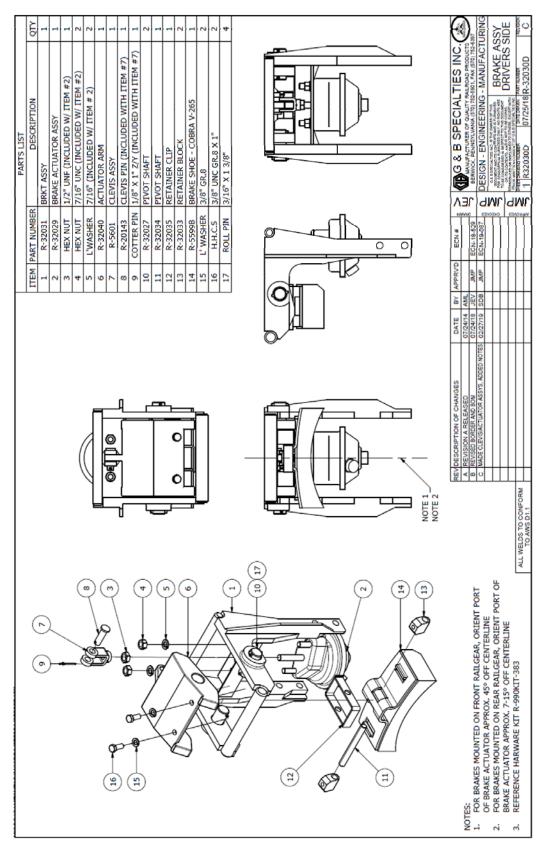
R-32030D (R-1110 Driver Side Front Brake Assy)
